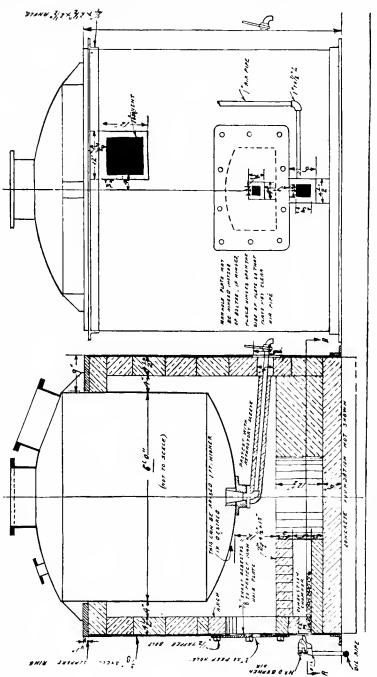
Cylindrical chemical still. Tangential flame equipment.
